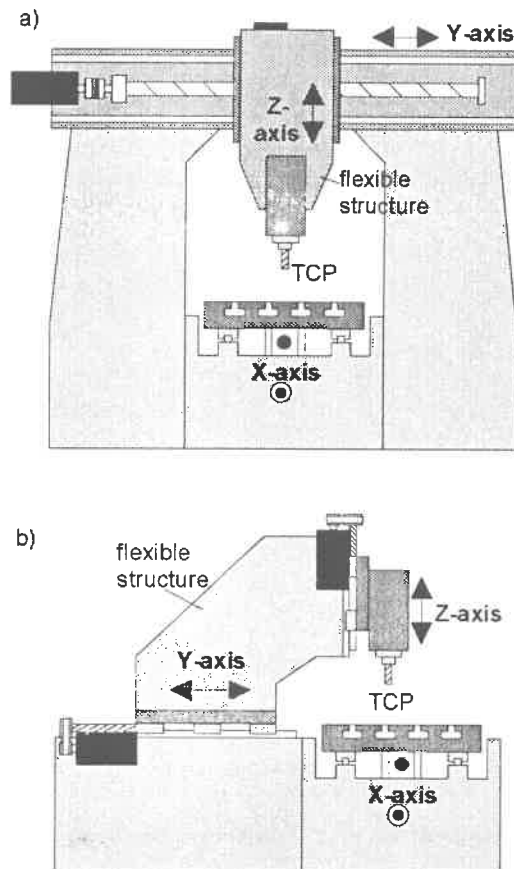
Typical axis arrangement of HSM machine tools with serial kinematics
